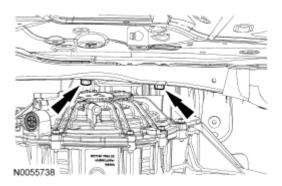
Locating RH Exhaust Manifold Heat Shield & Nuts Courtesy of FORD MOTOR CO.
